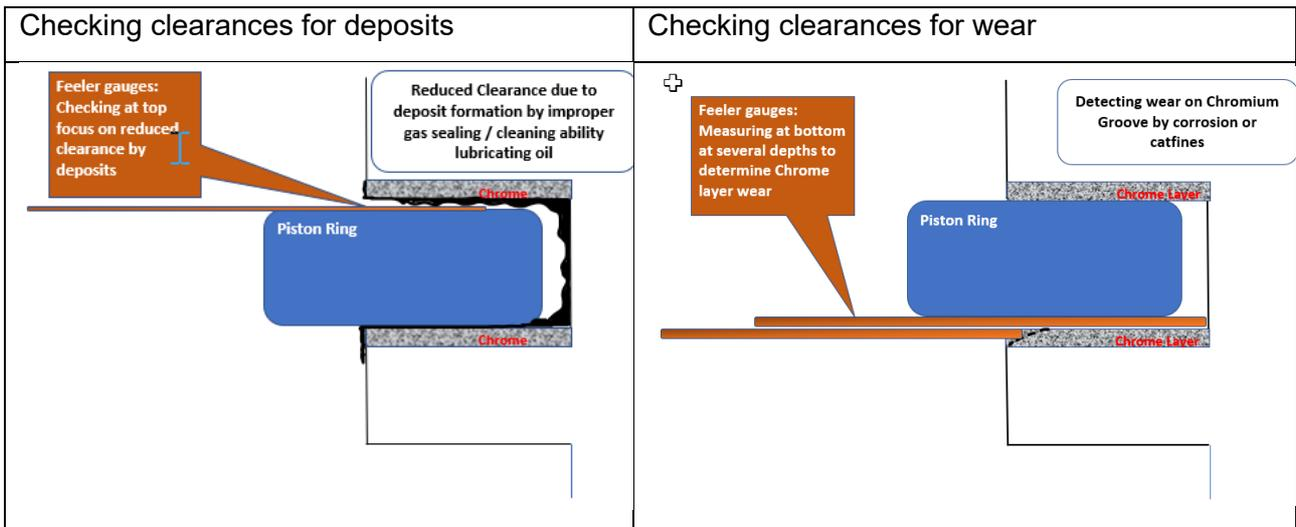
Checking of ring groove condition. Also refer to OEM guidelines.
